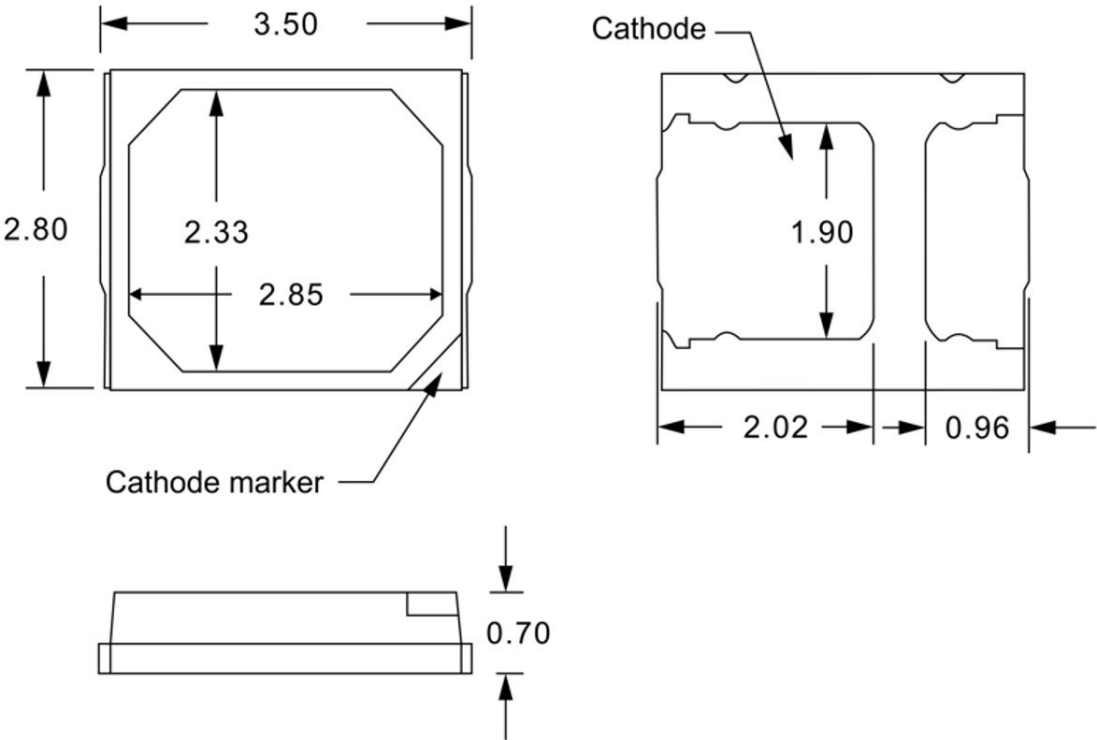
Mechanical dimensions for LUXEON 2835 Commercial Deep Dimming
